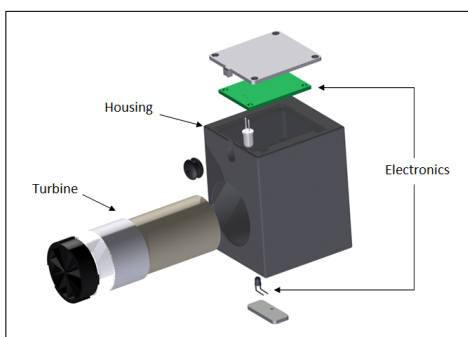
CAD model presenting an exploded view showing the components of the prototype
